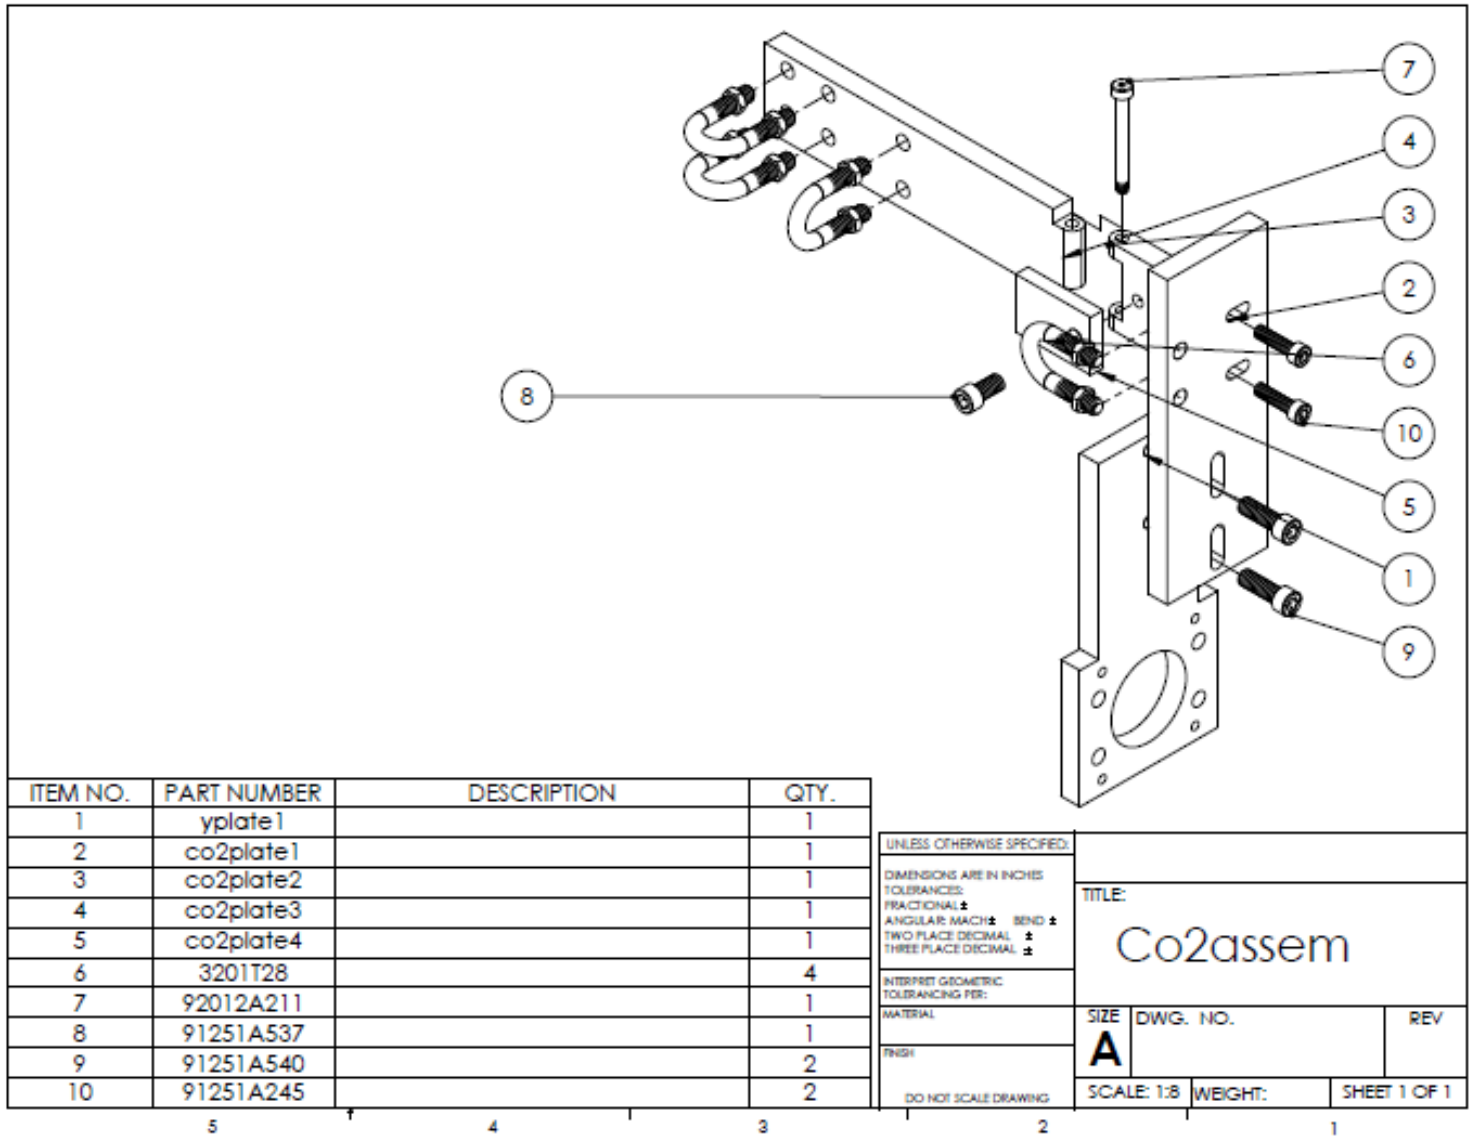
Assembly drawing of the supercritical CO₂ delivery sub-system
